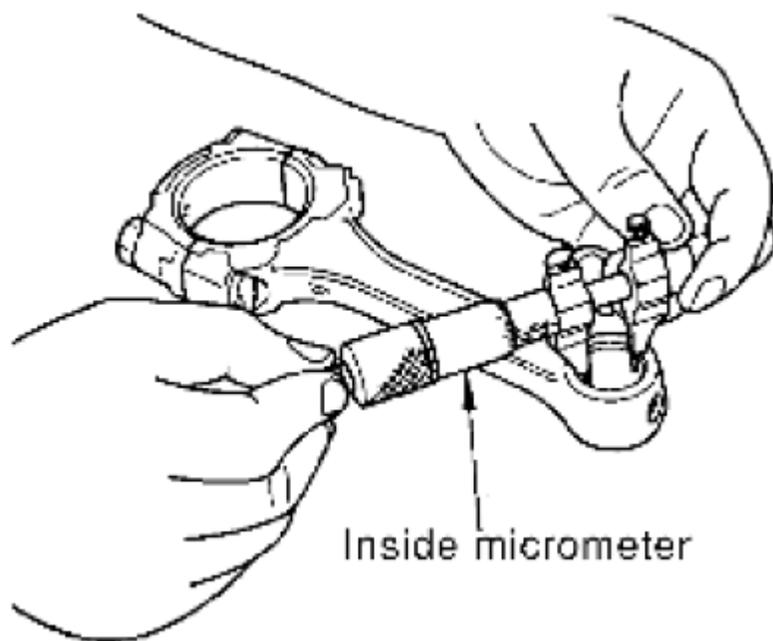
Measuring Connecting Rod Bushing Inner Diameter
